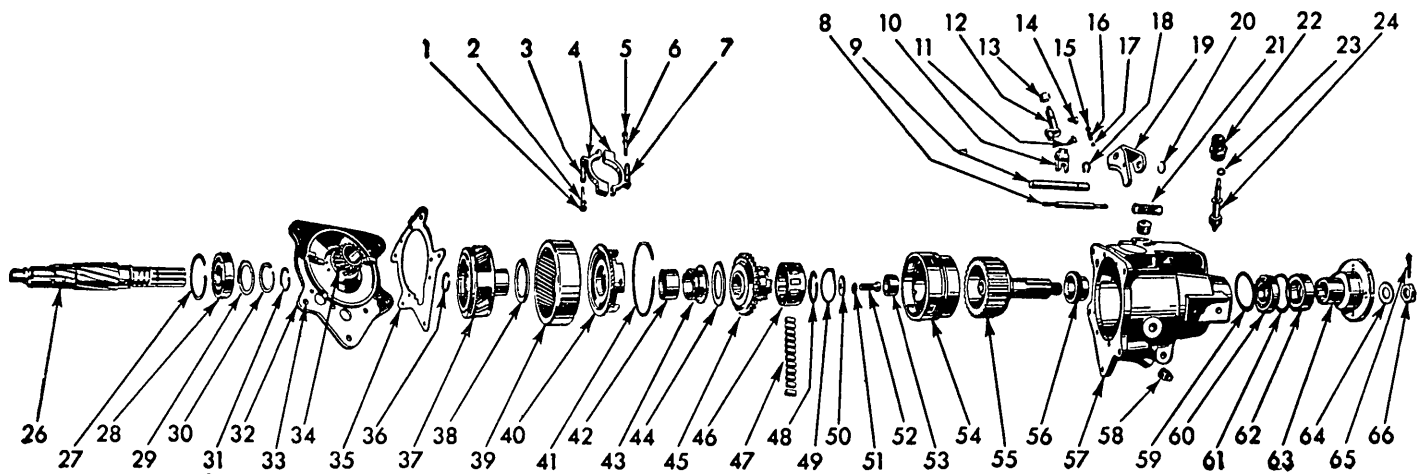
Overdrive without electric control. Type with three planet pinions and separate housings. See Fig. 5 for car application
